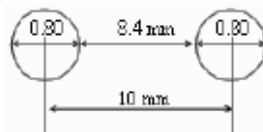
Dimensions [mm] of the holes drilled in the specimen
